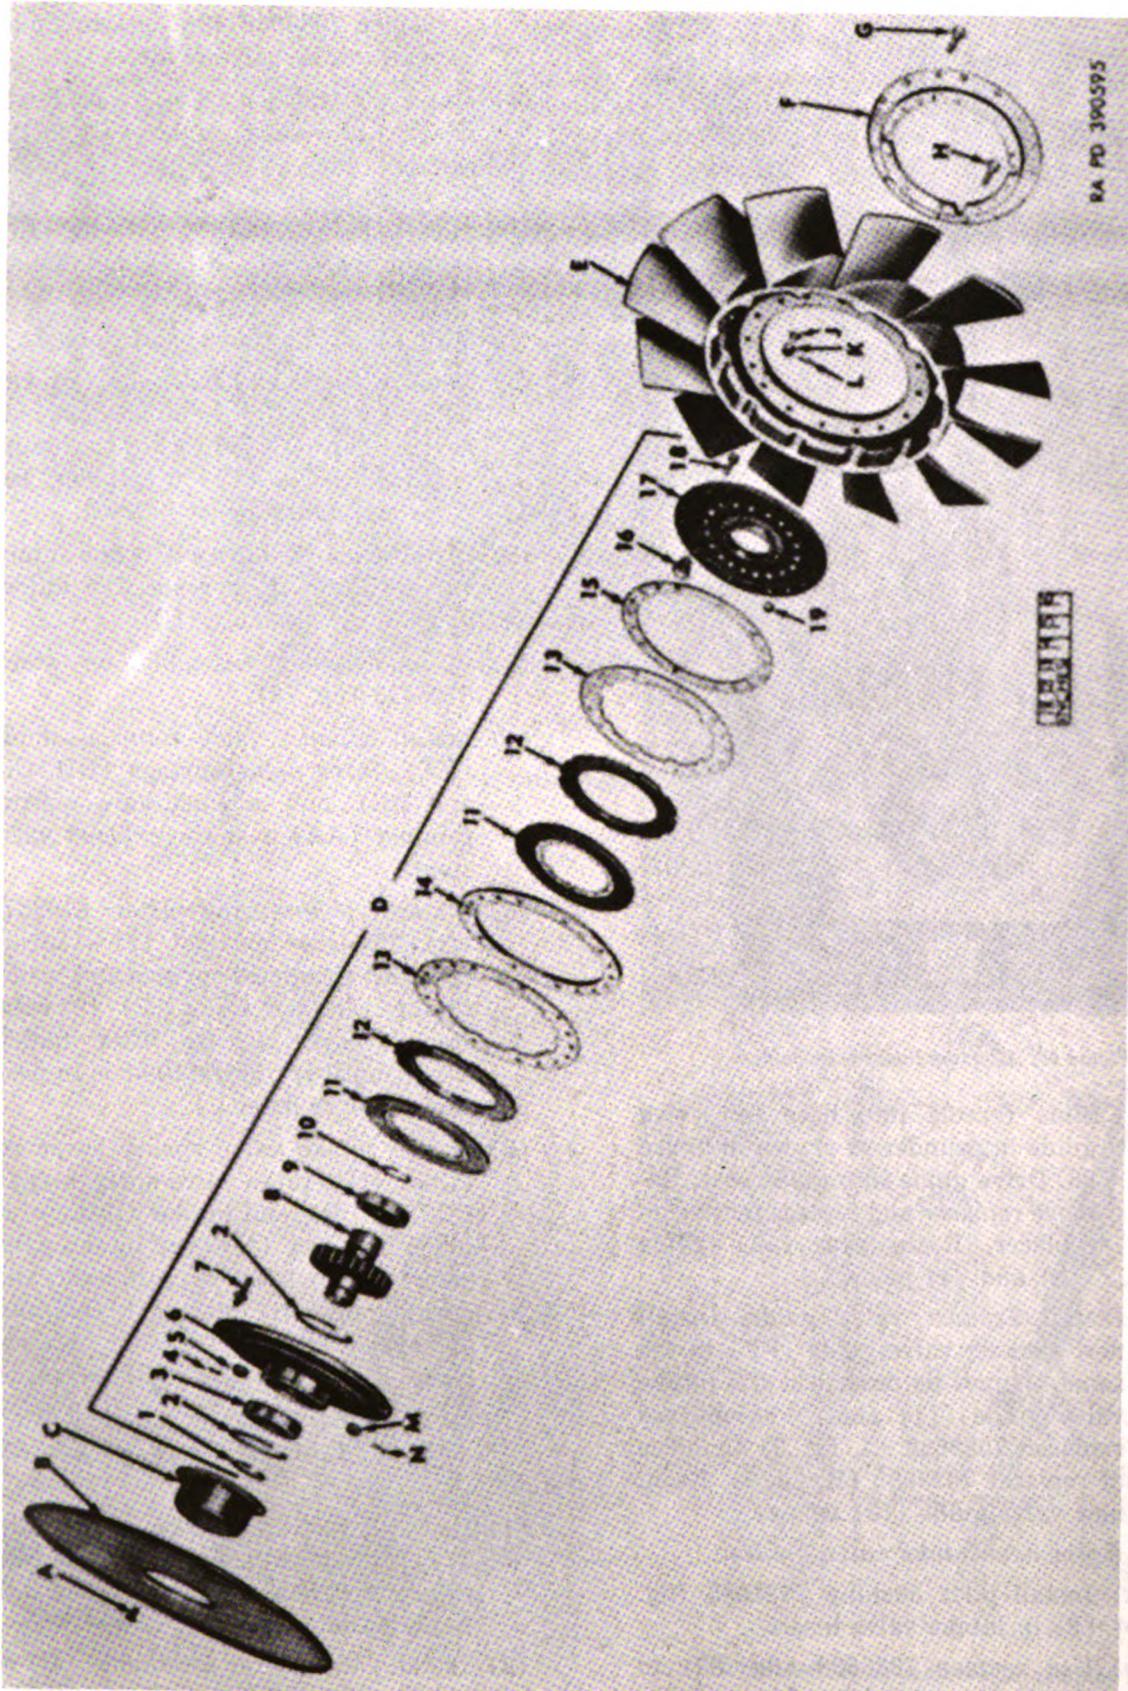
Cooling fan drive clutch assembly and rotor—exploded view.
